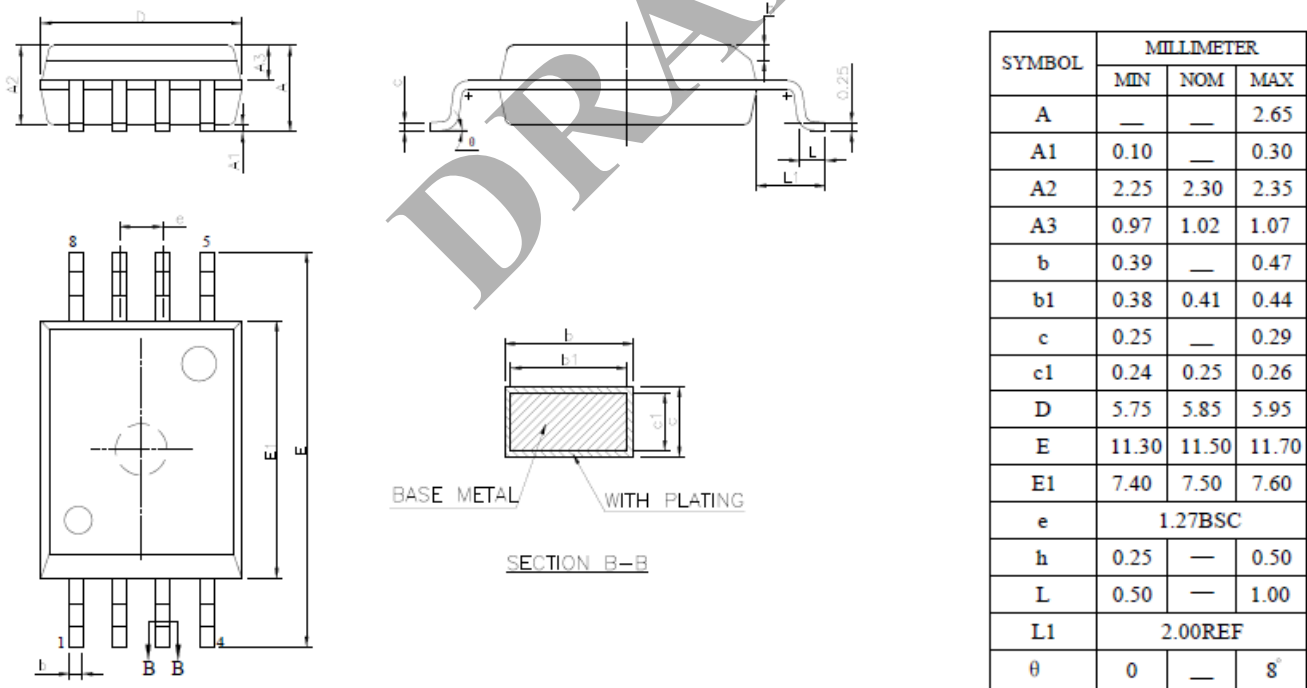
8-Lead Wide Body SOIC [WB SOIC-8] Outline Package-dimension unit(mm)
